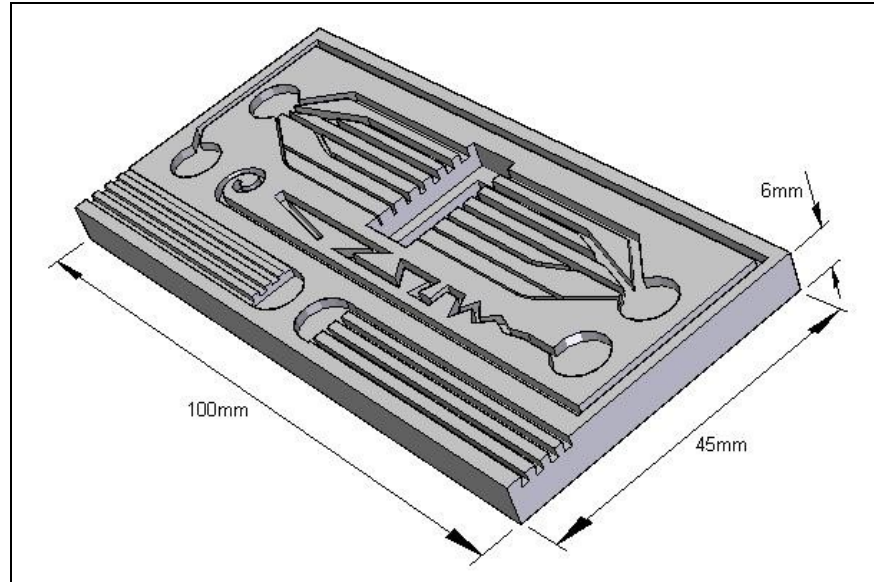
Isometric view of test plate including channels under test, chip pit and casting wells
